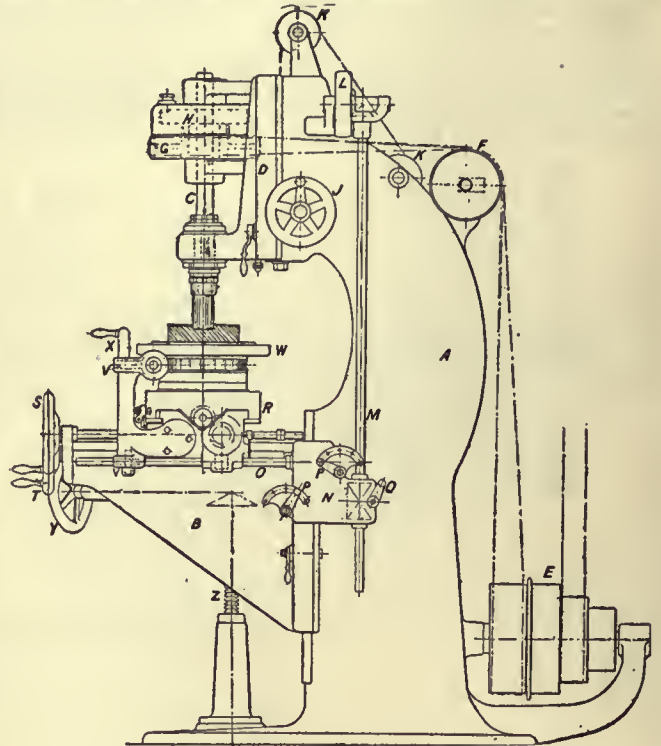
Vertical Spindle Milling Machine. (James Archdale & Co., Ltd.)
